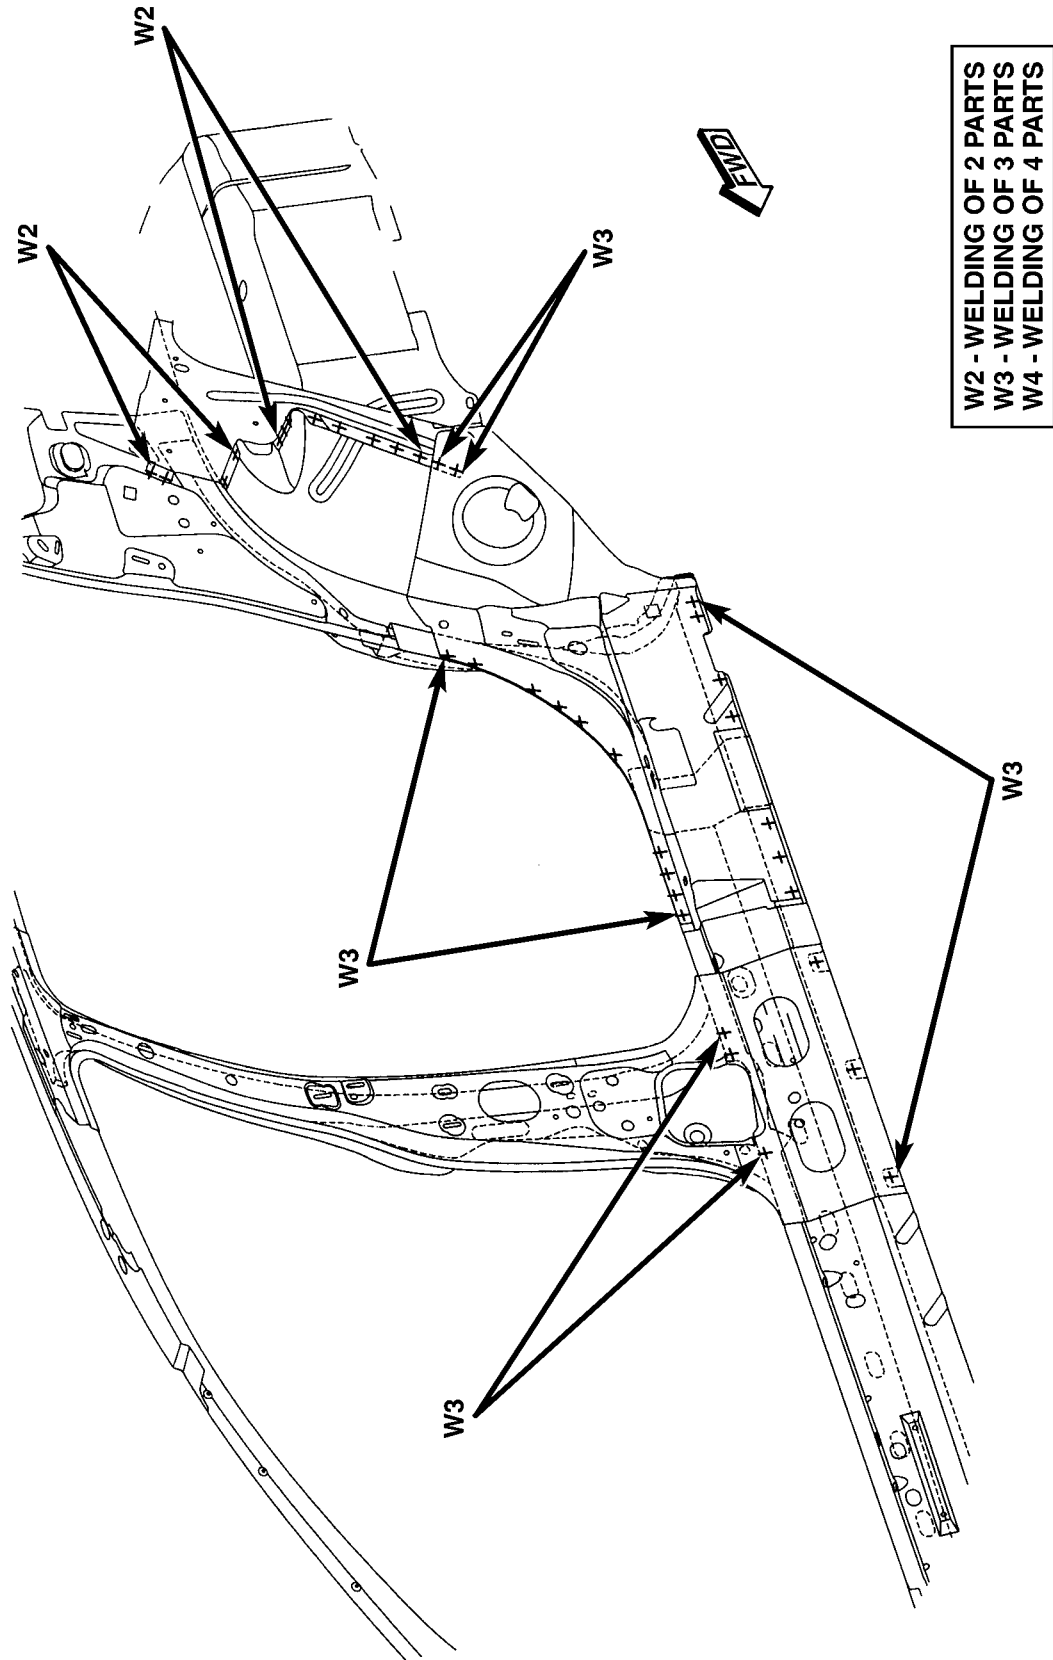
INNER SILL EXTENSION TO SIDE SILL REINFORCEMENT TO BODY SIDE APERTURE & INNER REAR WHEELHOUSE
